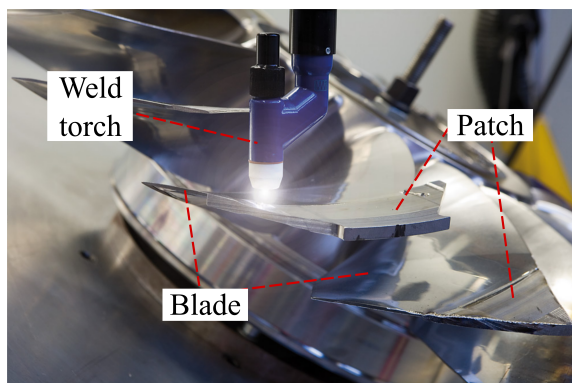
Joining patch and blade in a welding process. [124]
